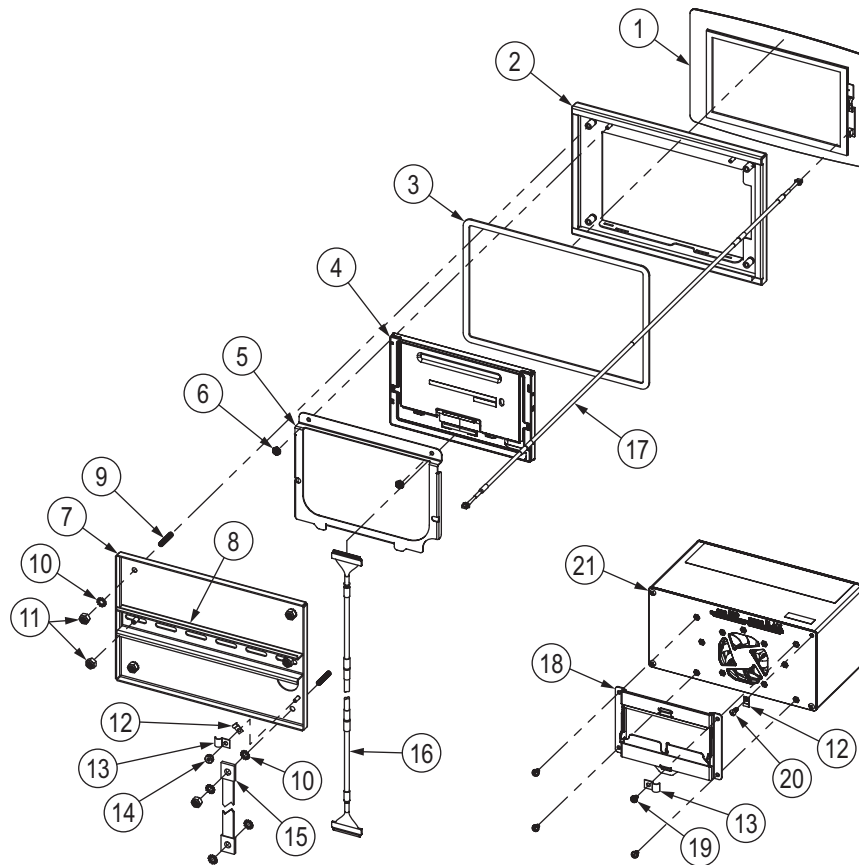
7" Touch-Only Panel Mount Repair Parts
